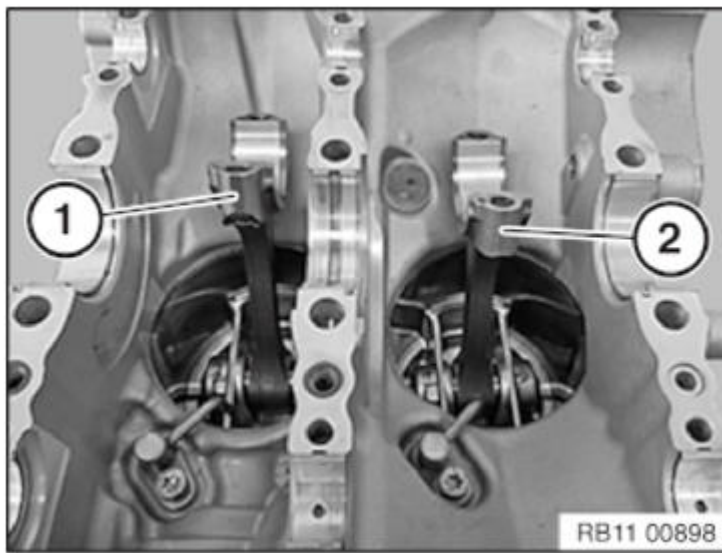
Identifying Connecting Rod And Bearing Cap
